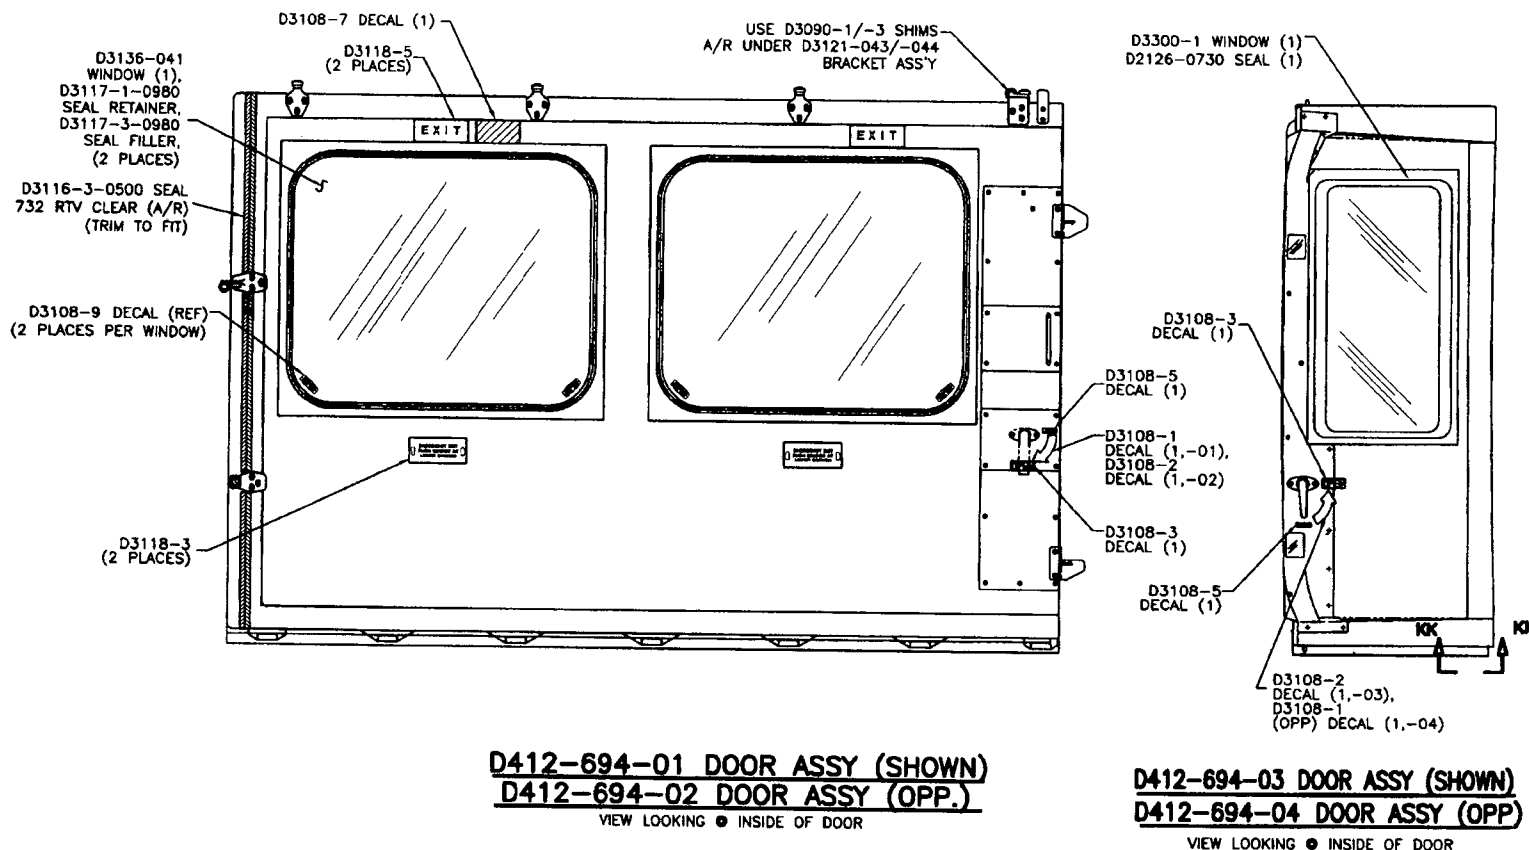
Replacement Parts, D412-694-03/-04 Door Assembly
